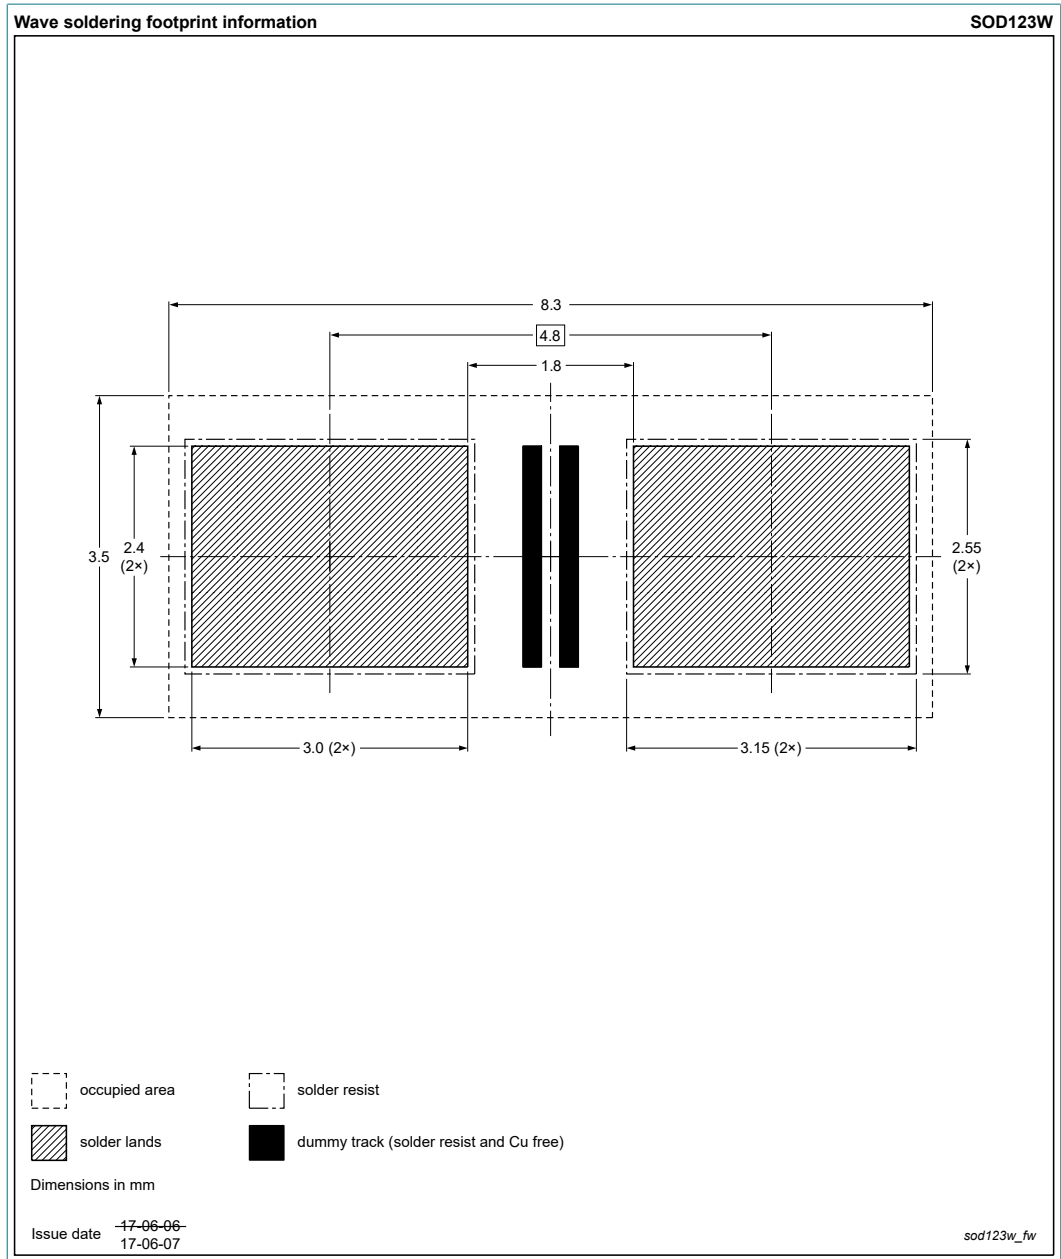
Wave soldering footprint for CFP3 (SOD123W)
